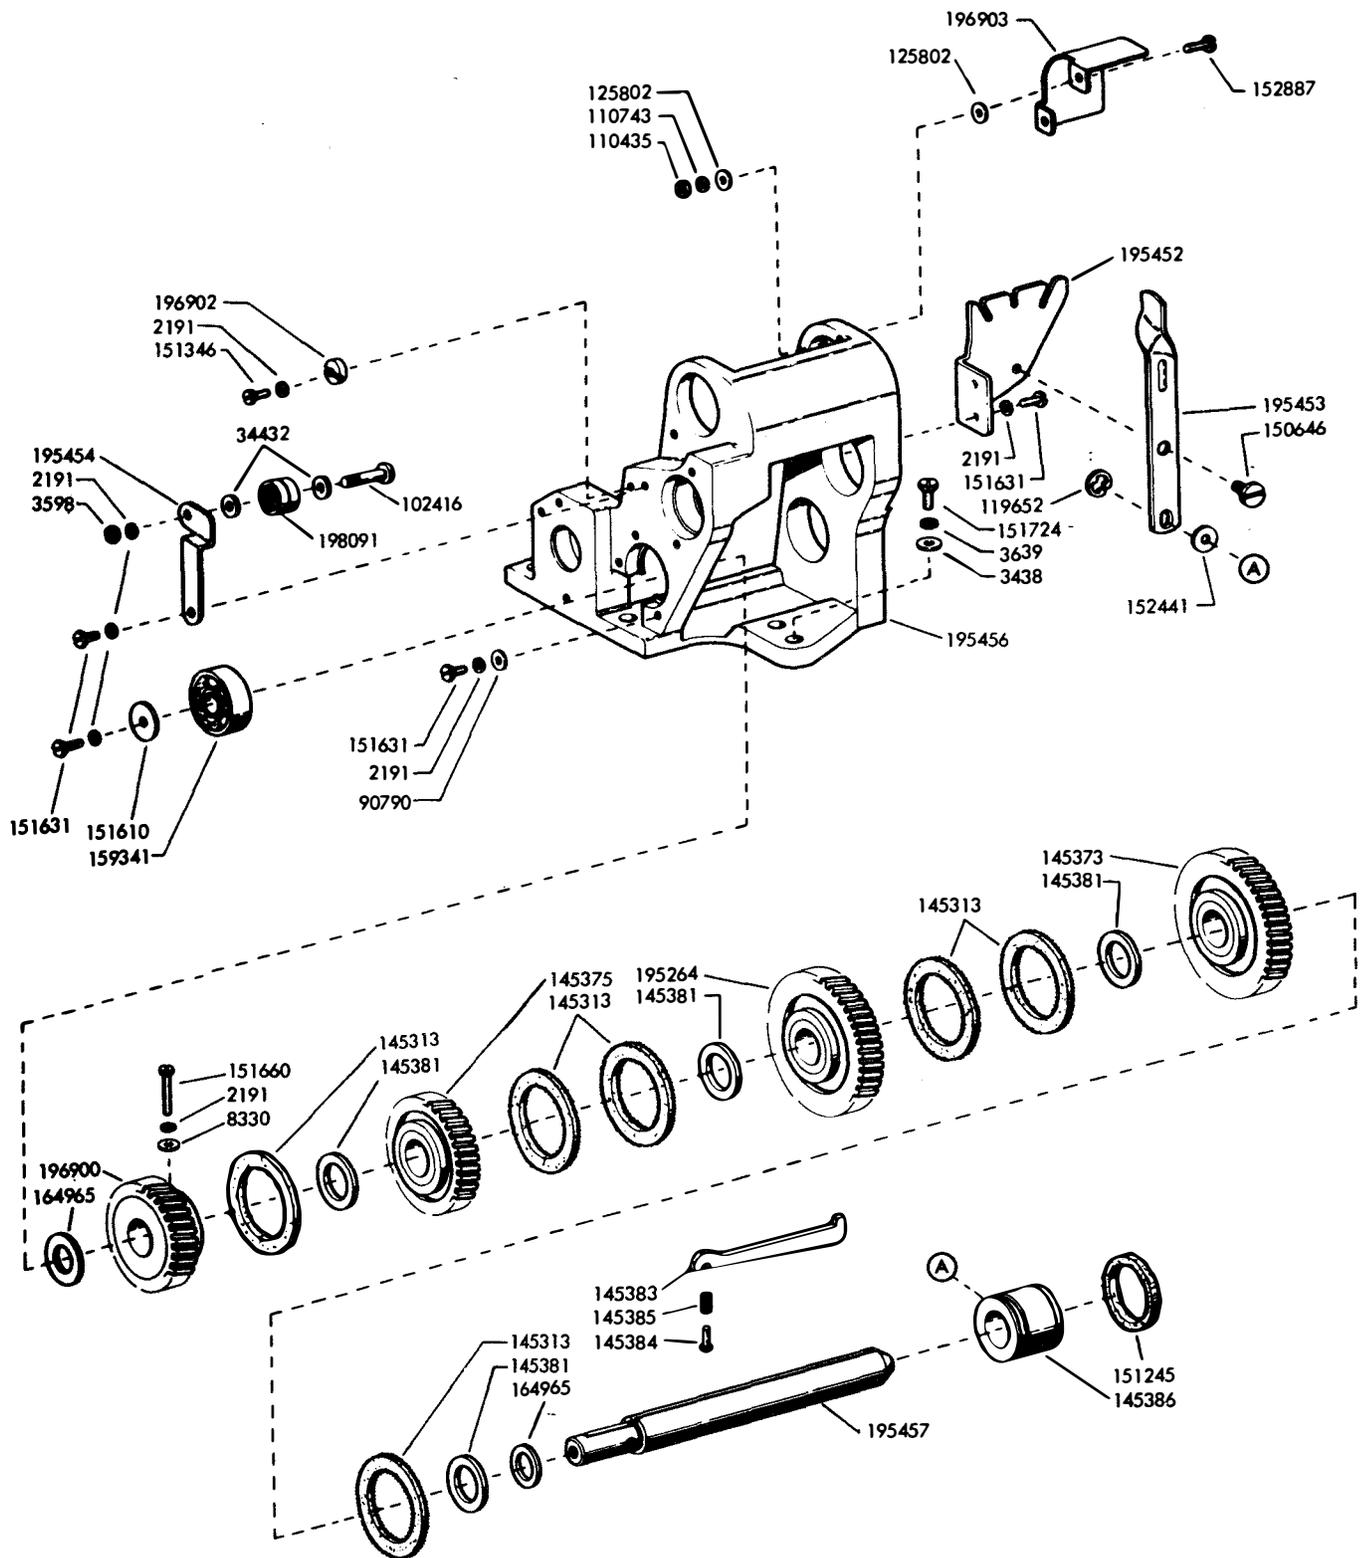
Modification Kits 195442 and 195443 to Add Three-Speed Gearshift Assemblies (Sheet 2 of 3)
